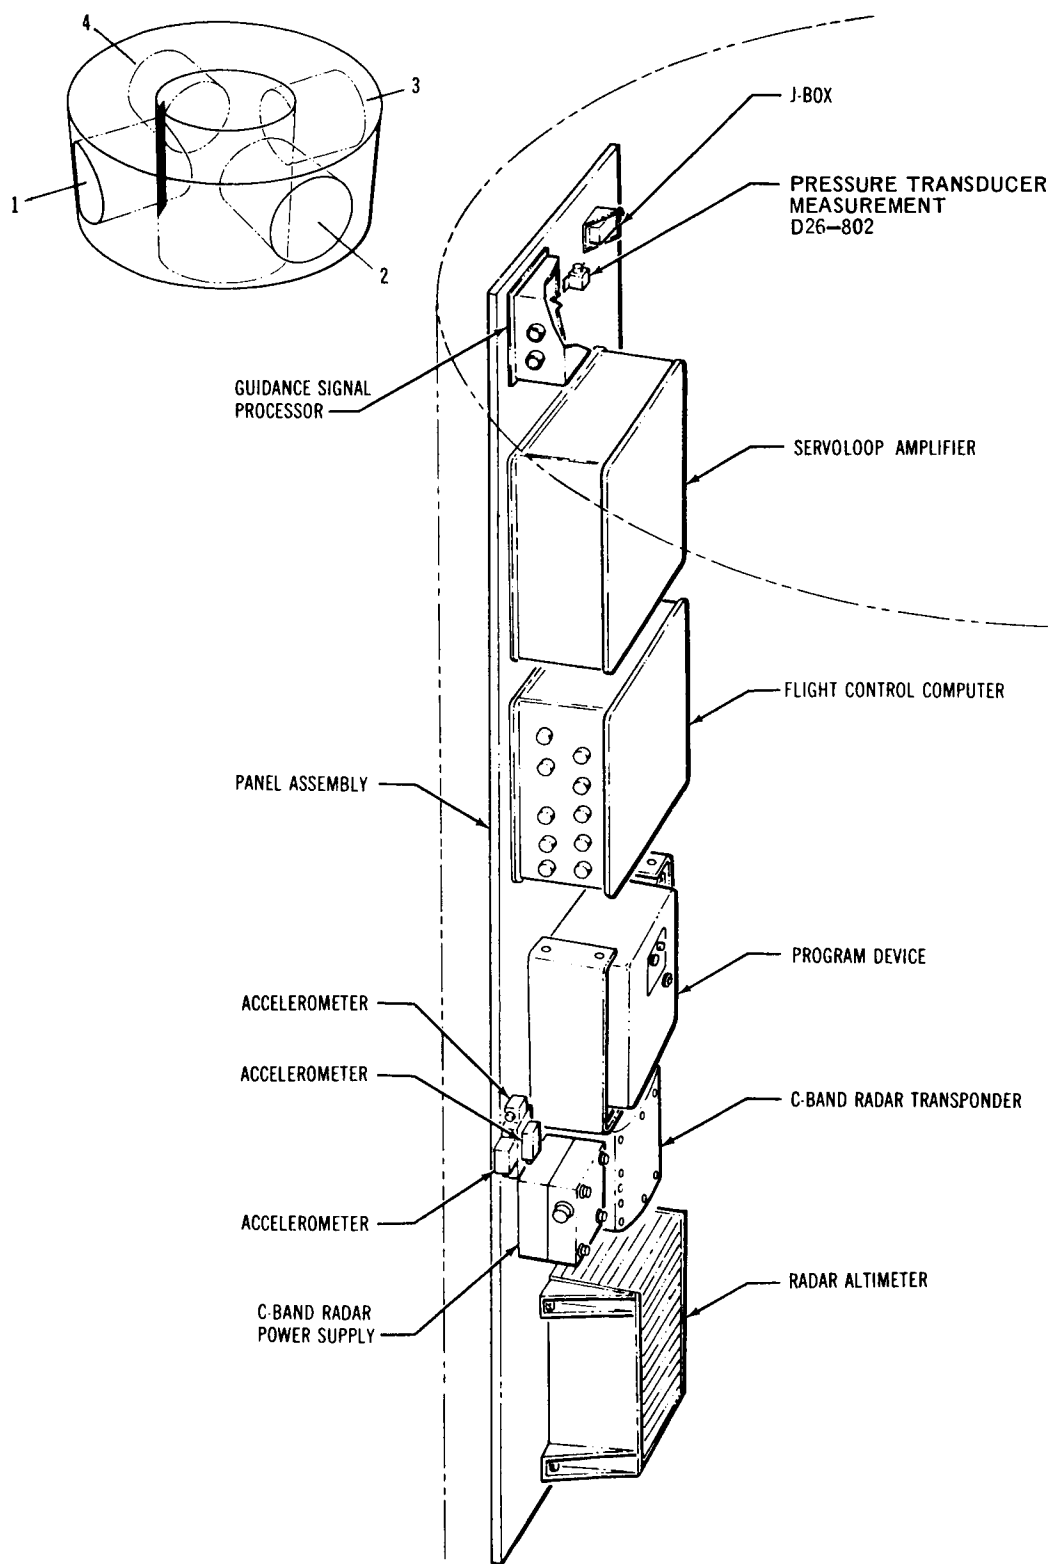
S-IU-6 INSTRUMENT UNIT, TUBE 5
